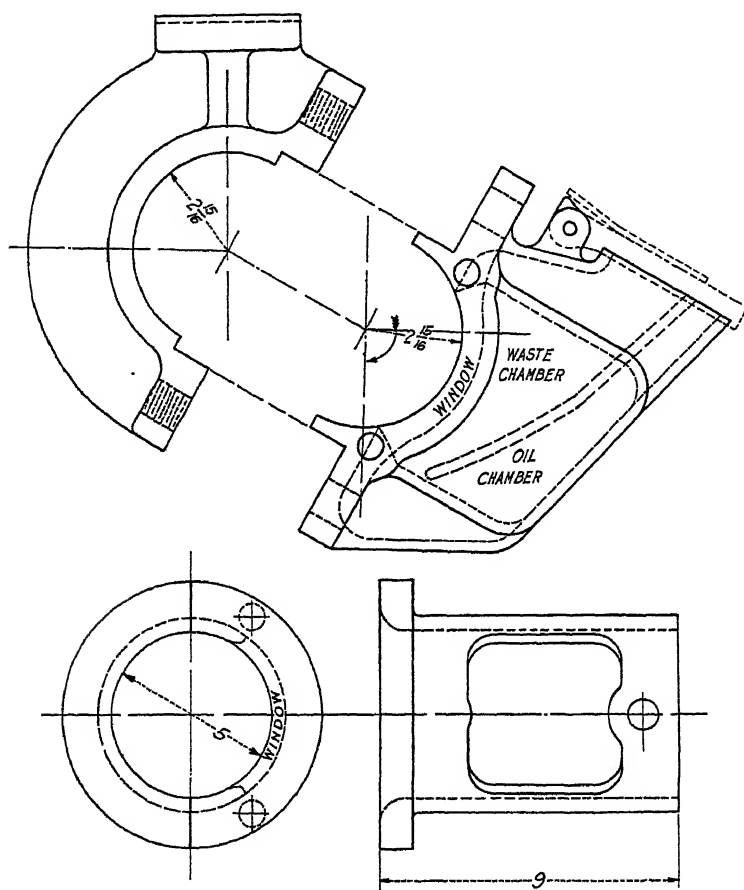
AXLE BEARING USED IN THE EXPERIMENTS
